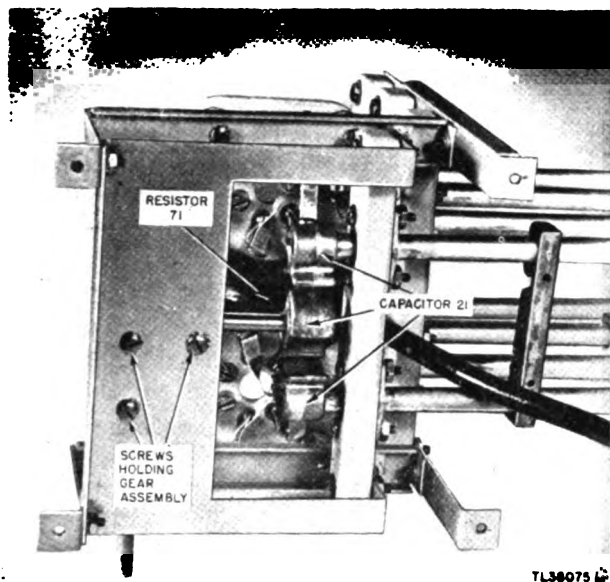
Oscillator assembly, under side, showing capacitor 21 and resistor 71.
